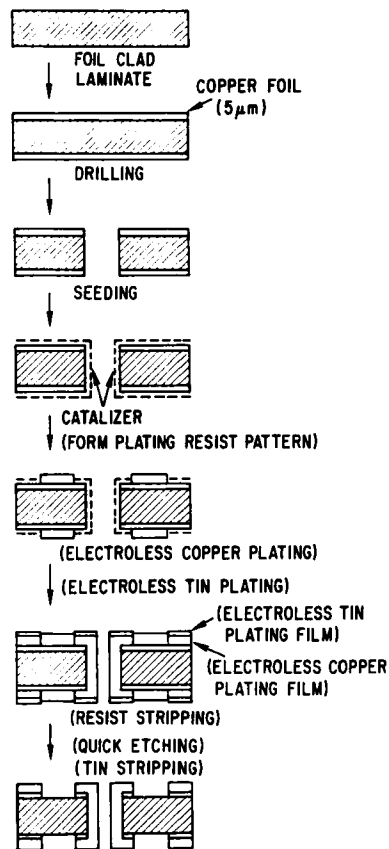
A Process for the Fabrication of Printed Circuit Boards and Plating Through Holes.
